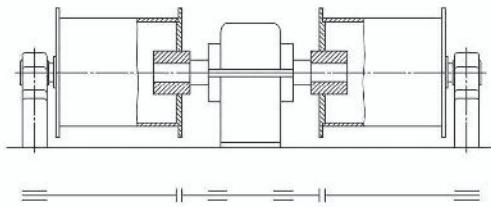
Diagram of a twin-drum drive without built-in joint.
